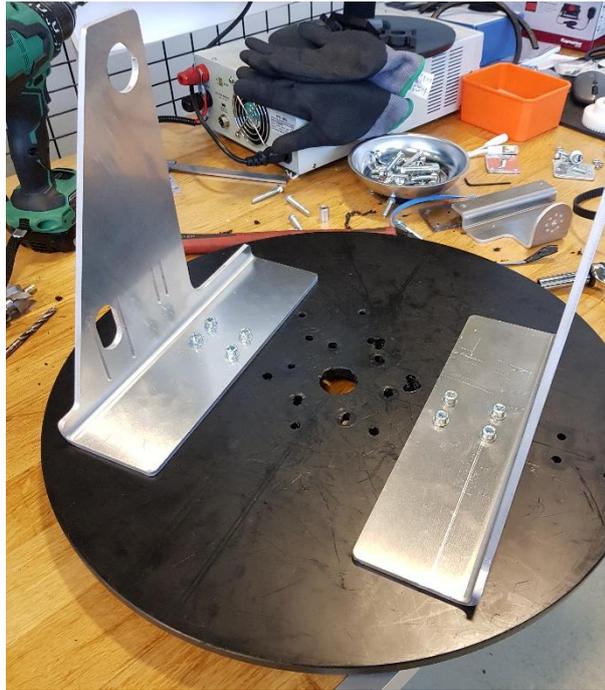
Antenna supports locked in place showing the old set of holes.
